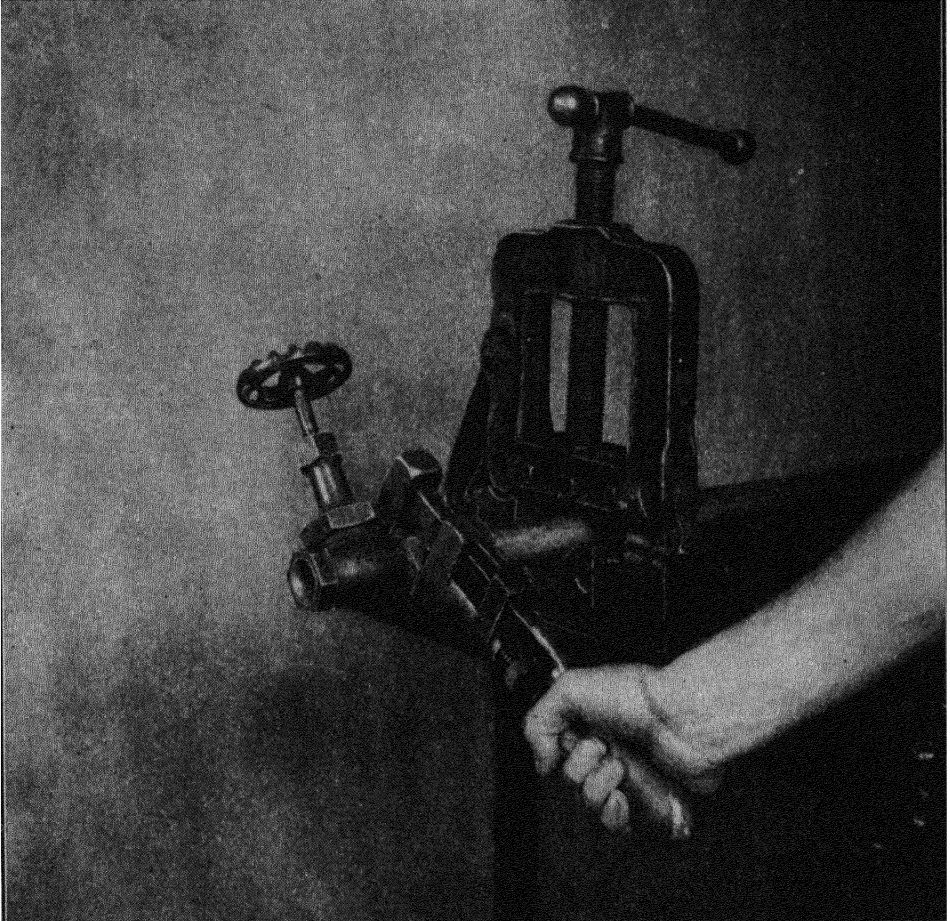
Proper method of screwing a brass valve on the end of a pipe.
